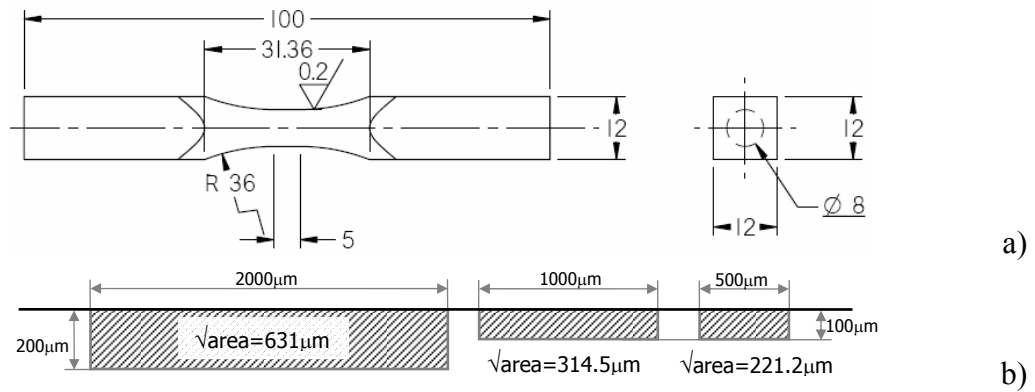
a) specimen shape and dimensions, b) micro notches geometry adopted for torsional and multiaxial fatigue tests
